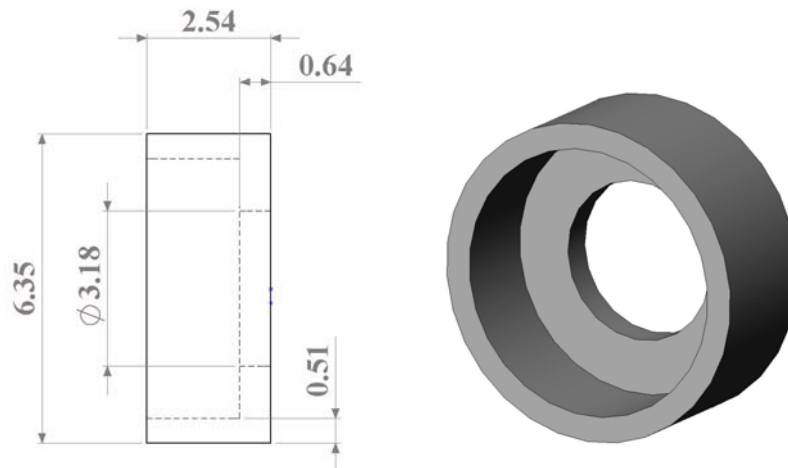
Drawing of the Faraday probe guard ring. The outer diameter of the guard ring is 6.35mm. All dimensions are in millimeters.
